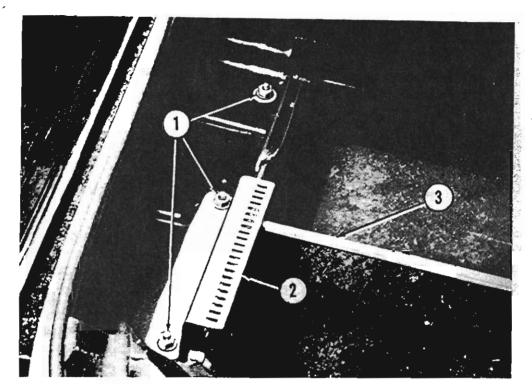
Four Door Sedan Front Seat Bottom Frame Screws, Cross Rod and Gear Rack.
